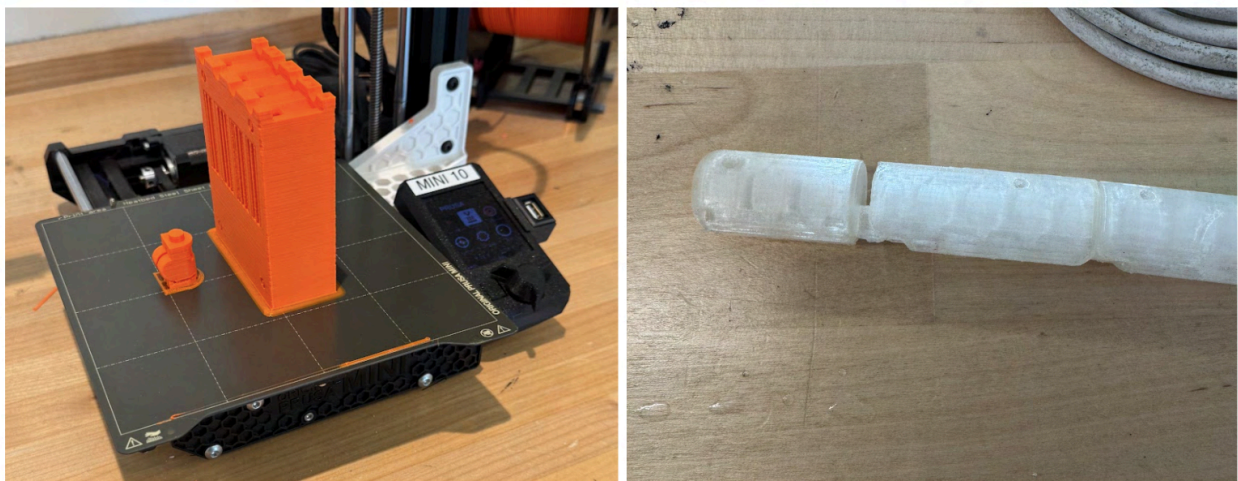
3D printed prototypes of (A) palm and passively-actuating knuckle and (B) arc joint finger
